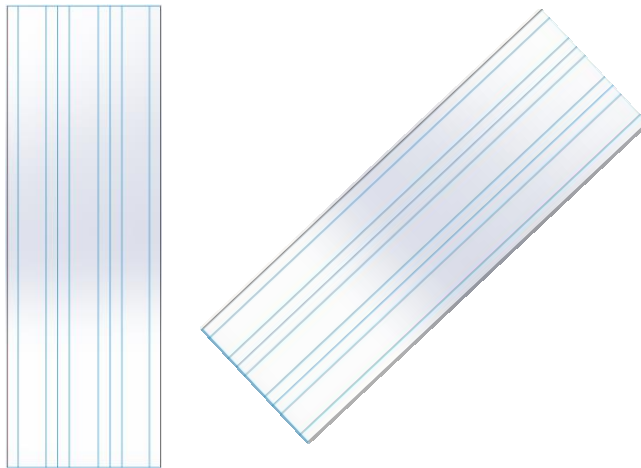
Four Bead  $0^0$  Stiffened Plate Cross Section
